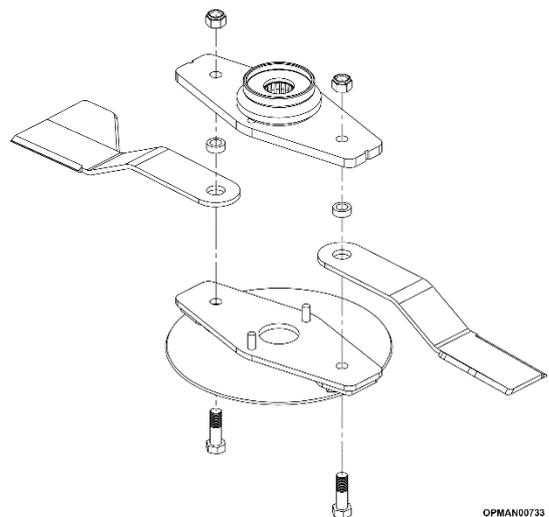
Multicut Blade Carrier Assembly (standard shown)
